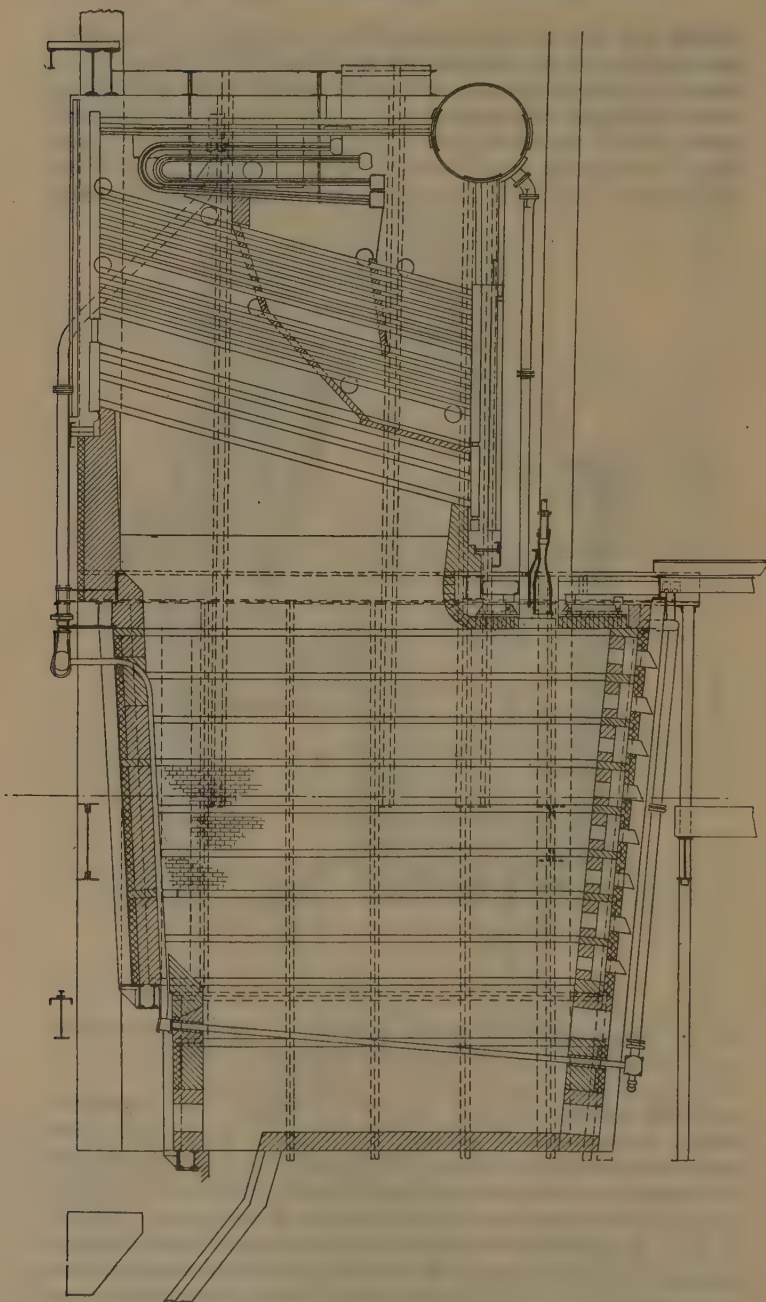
BABCOCK & WILCOX CROSS-DRUM BOILER, 15,326 SQ. FT. OF HEATING SURFACE. SPRINGDALE PLANT, WEST PENN POWER COMPANY
